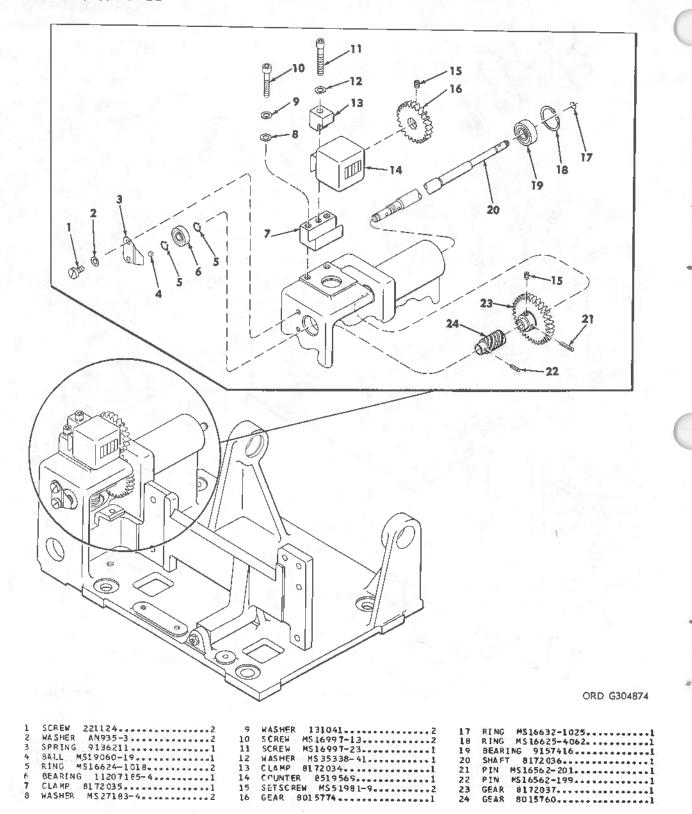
LEVEL, PRECISION, MASTER SUBASSEMBLY /8172012/-PARTIAL EXPLODED VIEW
